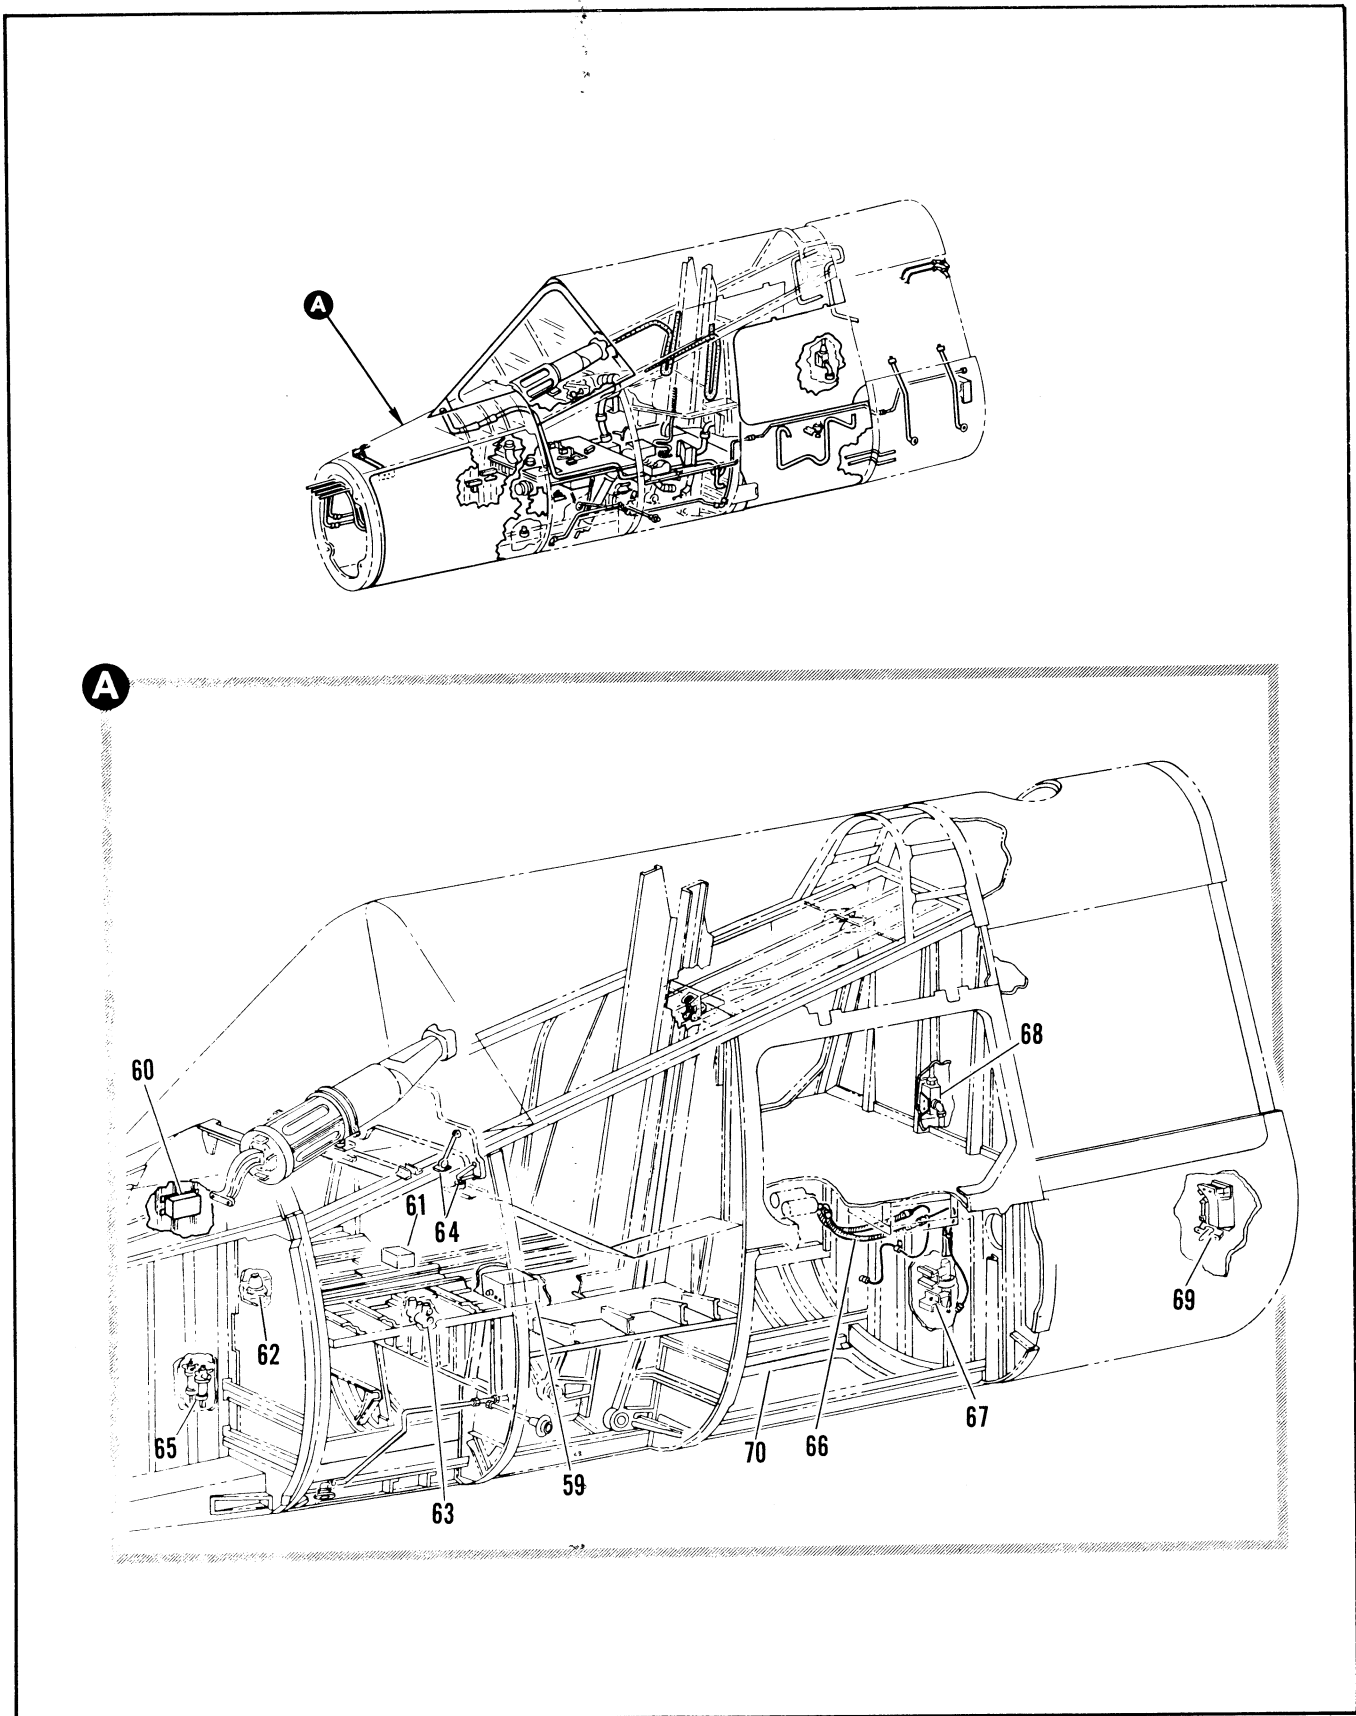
Fuselage Assembly Sta 40 to 216 (Sheet 6 of 6)
